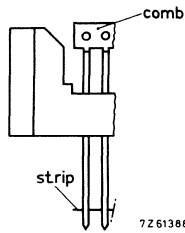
Panel part with pins for mini wire wrap (back panel version).
